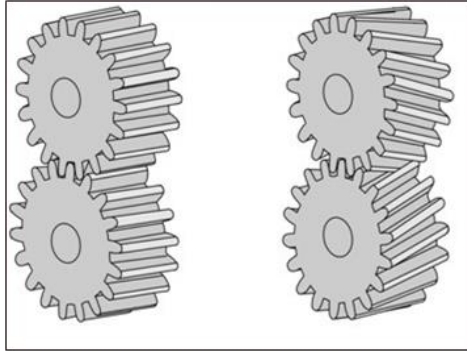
Left to right, a pair of spur gears, helical gears [19]
